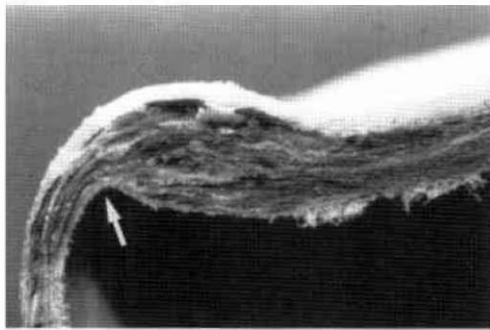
Photograph of a cross-sectional view of a "buckle" type failure.
